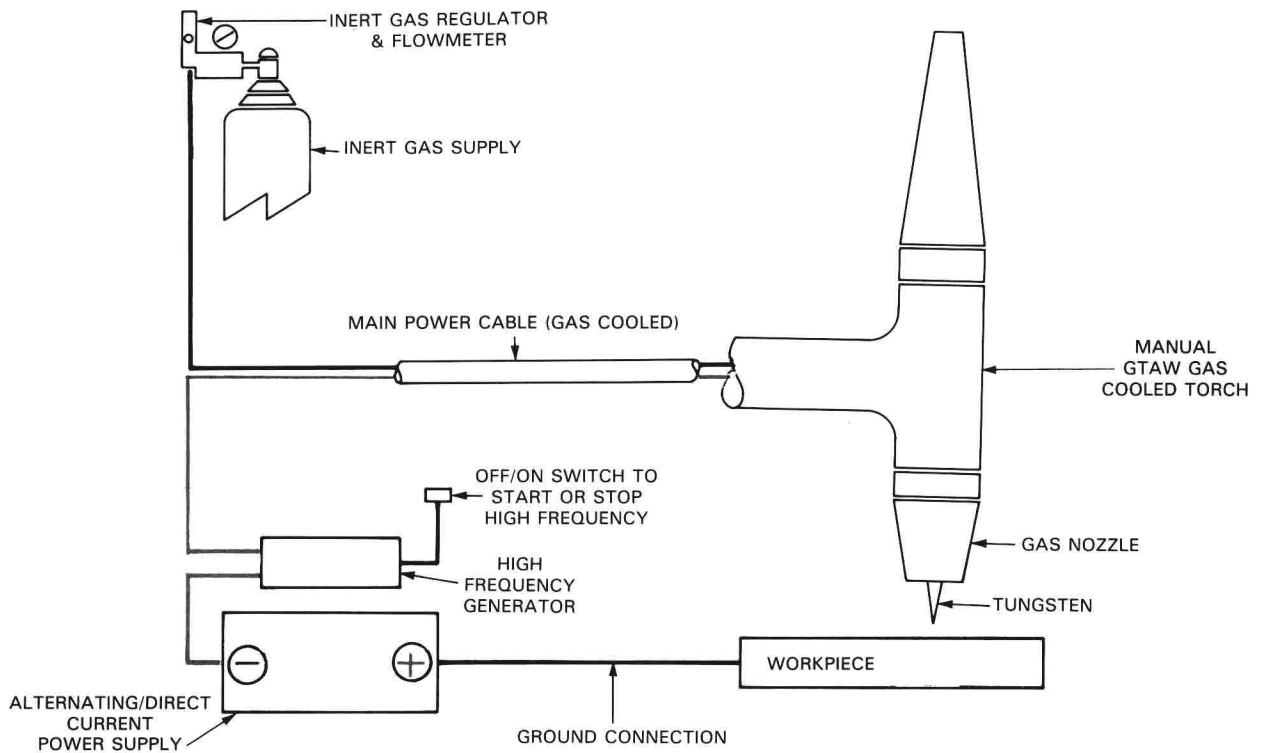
Both aluminum and steel can be welded with a combination alternating and direct current welding power supply.
